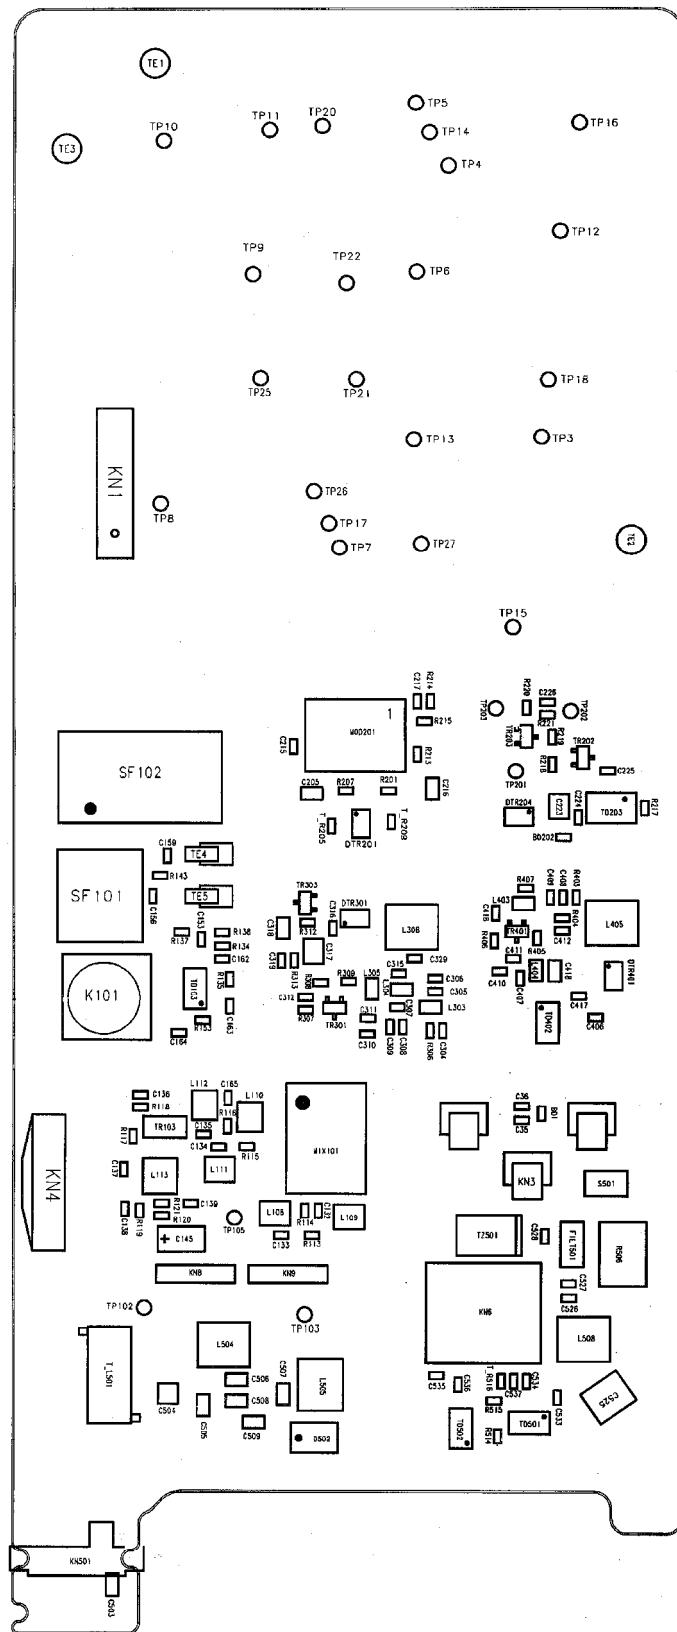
UHF RF and Control PCB Assembly Bottom Side
